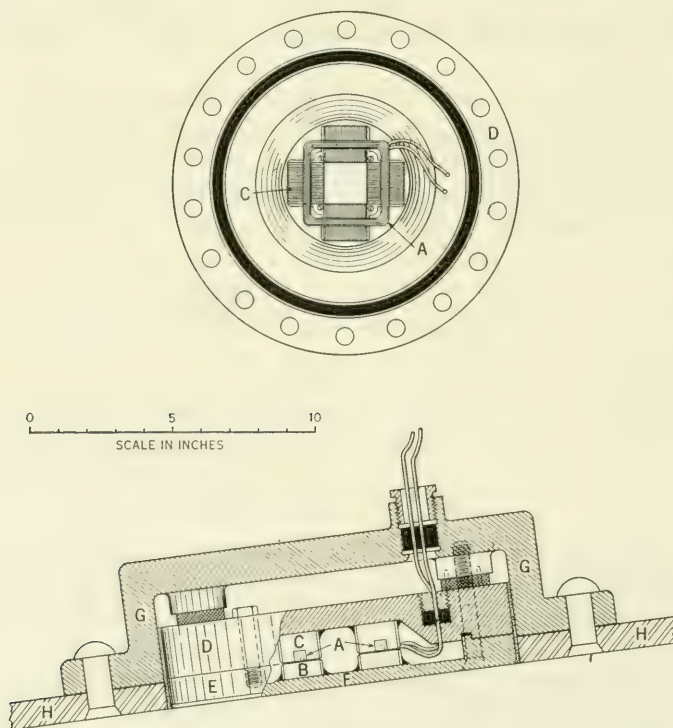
Electromagnetic oscillator type 324. *A.* Exciting coil. *B* and *C.* Steel laminations. *D* and *E.* Upper and lower sections of housing. *F.* Stainless steel diaphragm. *G.* Hull mounting. *H.* Hull plate.
